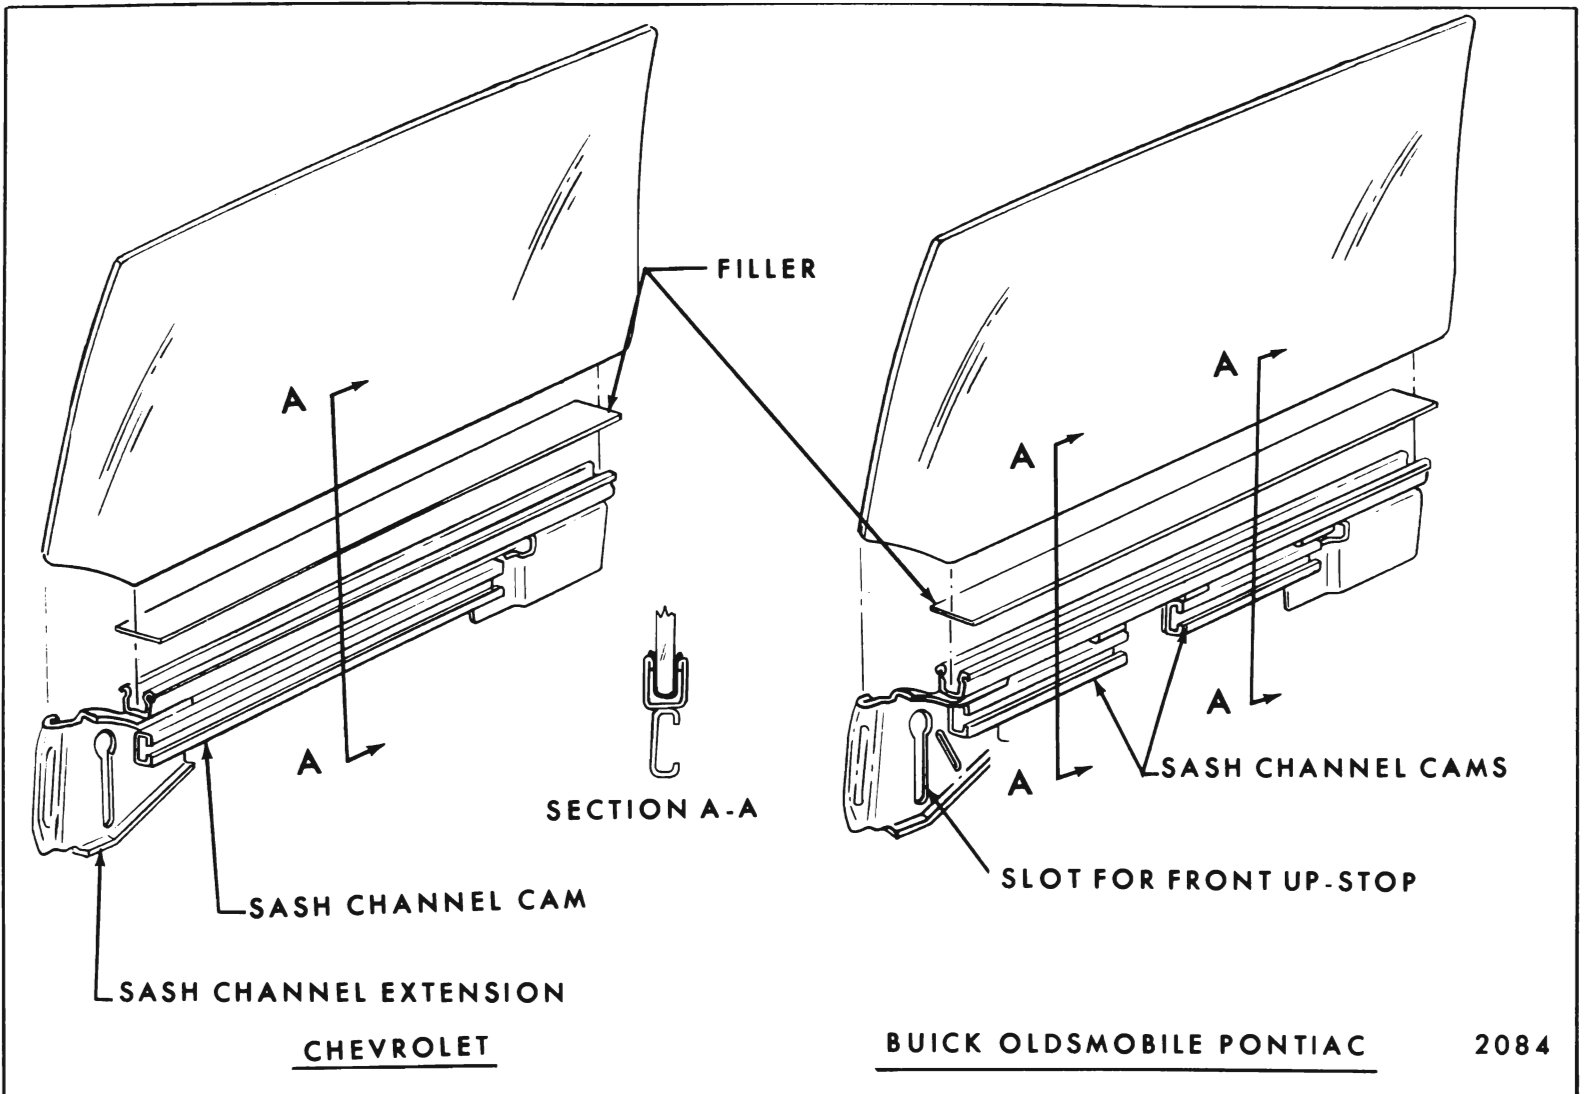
Front Door Window Assembly - "A-17 and 67" Style
